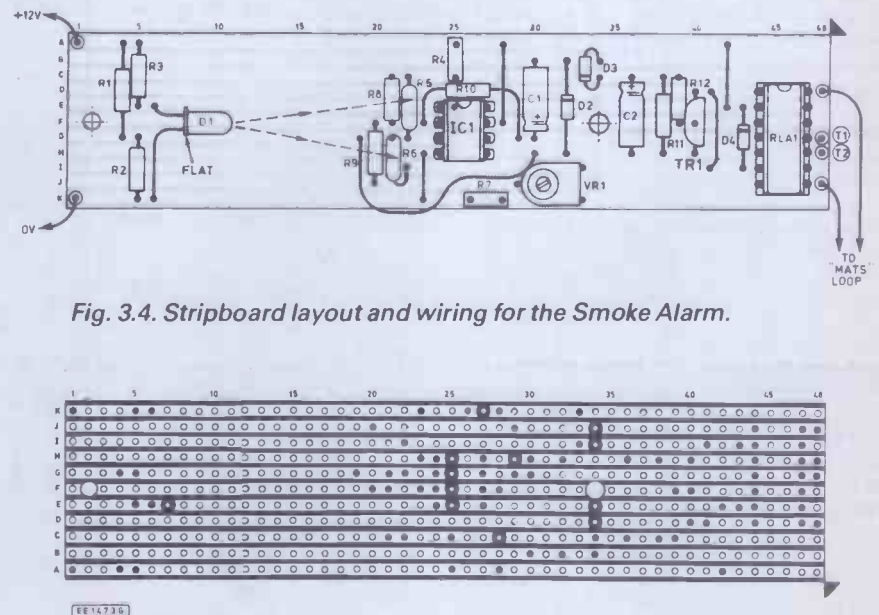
Stripboard layout and wiring for the Smoke Alarm.
